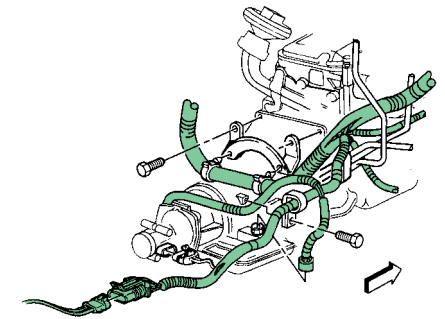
A close-fitting wiring harness is subject to damage. Wiring harnesses should be inspected in areas where they pass through tight spots and near engine and exhaust system parts. (General Motors)
